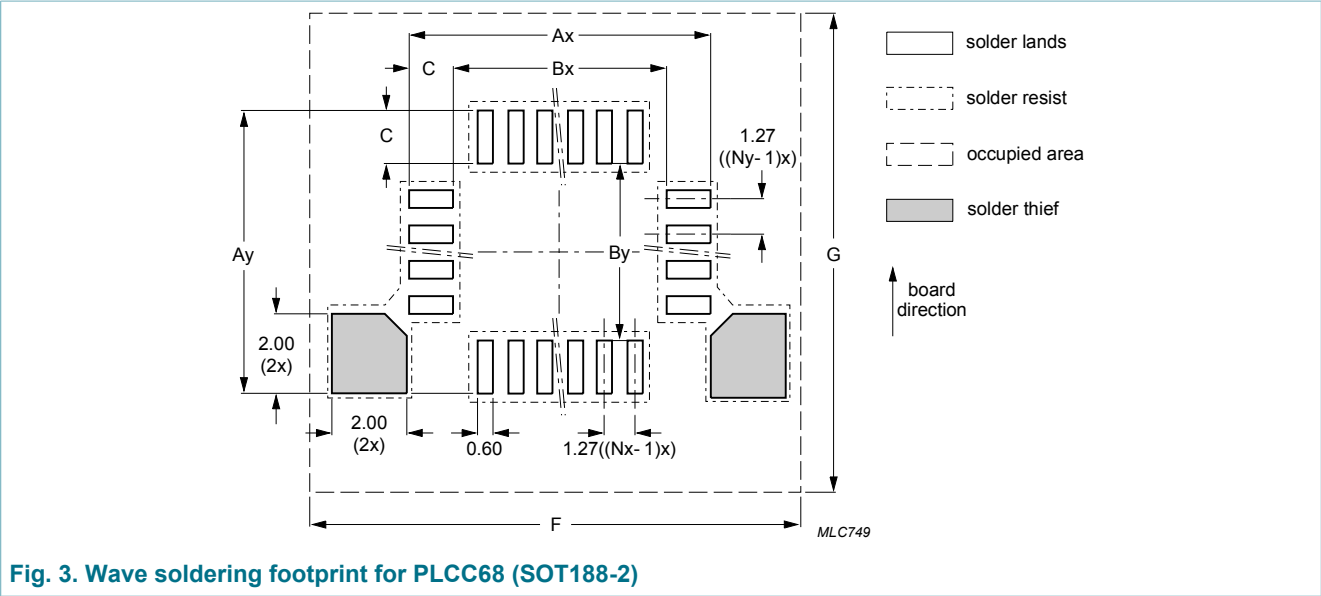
Wave soldering footprint for PLCC68 (SOT188-2)
